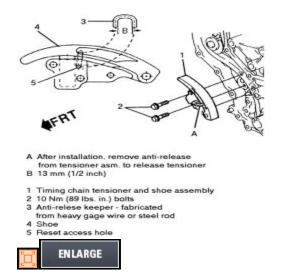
Reloading the tensioner to its ZERO position, then install to the chain housing
